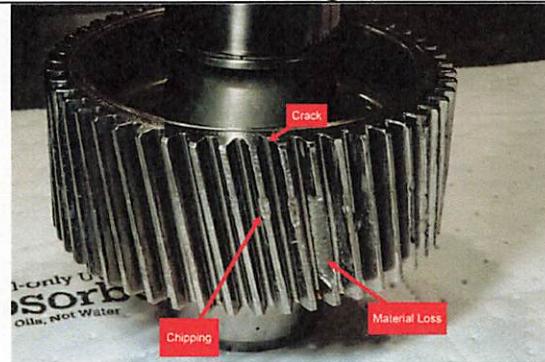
Photo of LH PRGB -105 Lower Input Idler Helical Gear Damage (Tab J-53)
